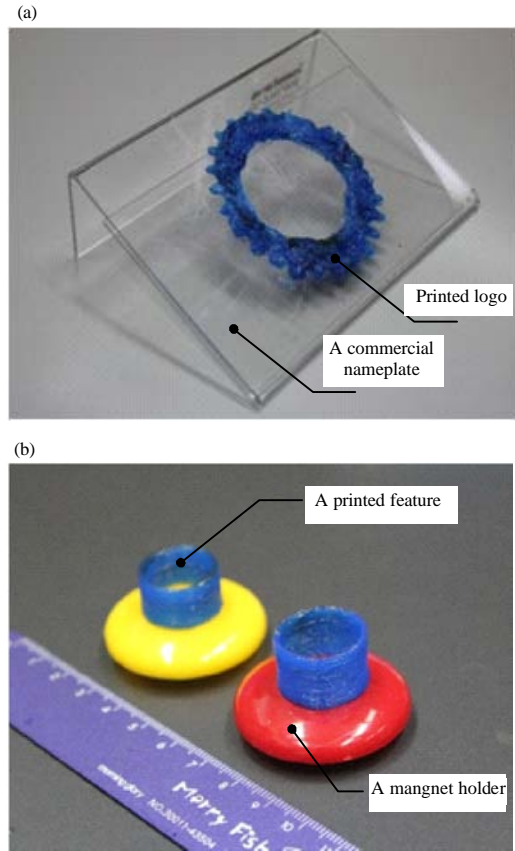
Some printing results: a) A G-code gear symbol printed on an incline plane and b) A FDM thin cylinder printed on refrigerator magnet holder
